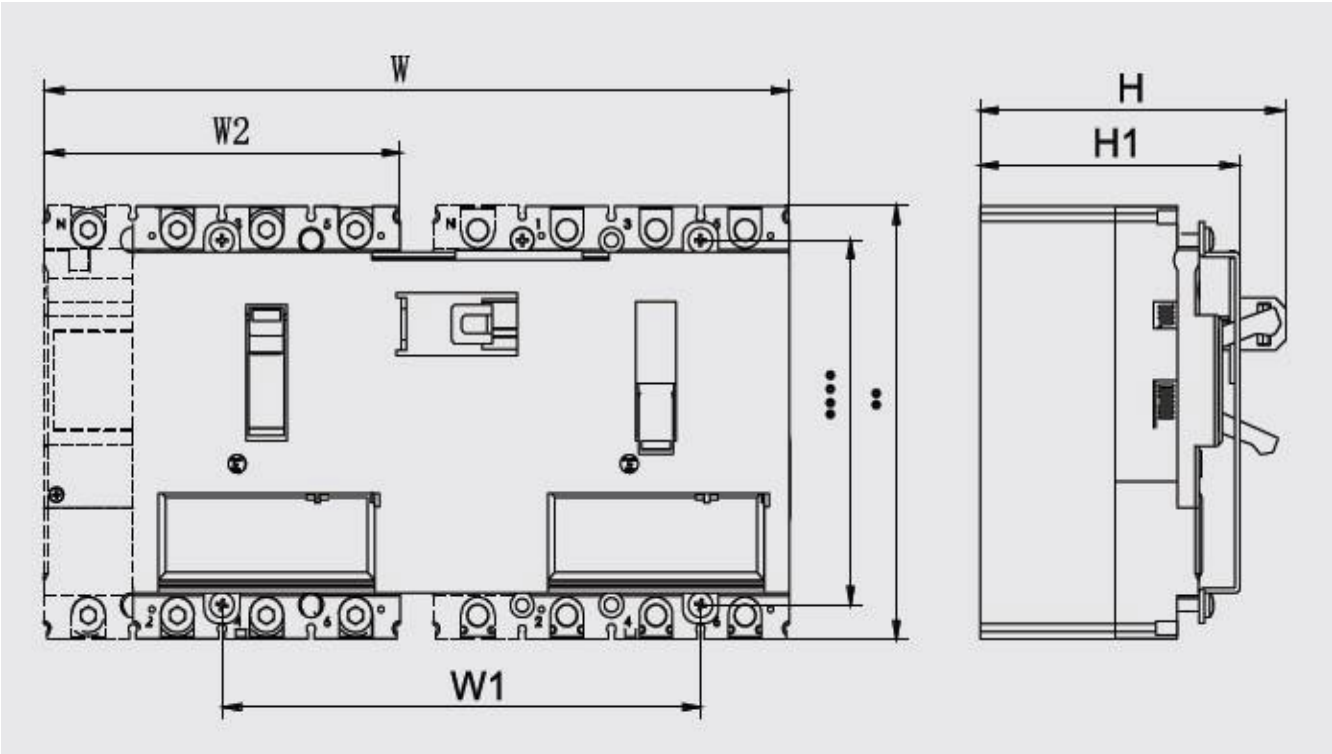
Outline dimension drawing of mechanical interlocking mechanism and circuit breaker after installation
